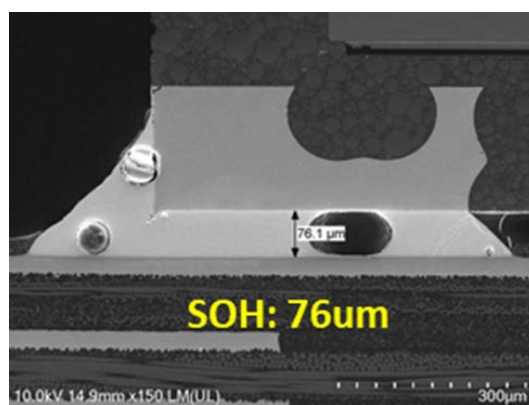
EPC2302 Actual Solder Stand-Off Height at Pin7 using 150 μm stencil thickness.
